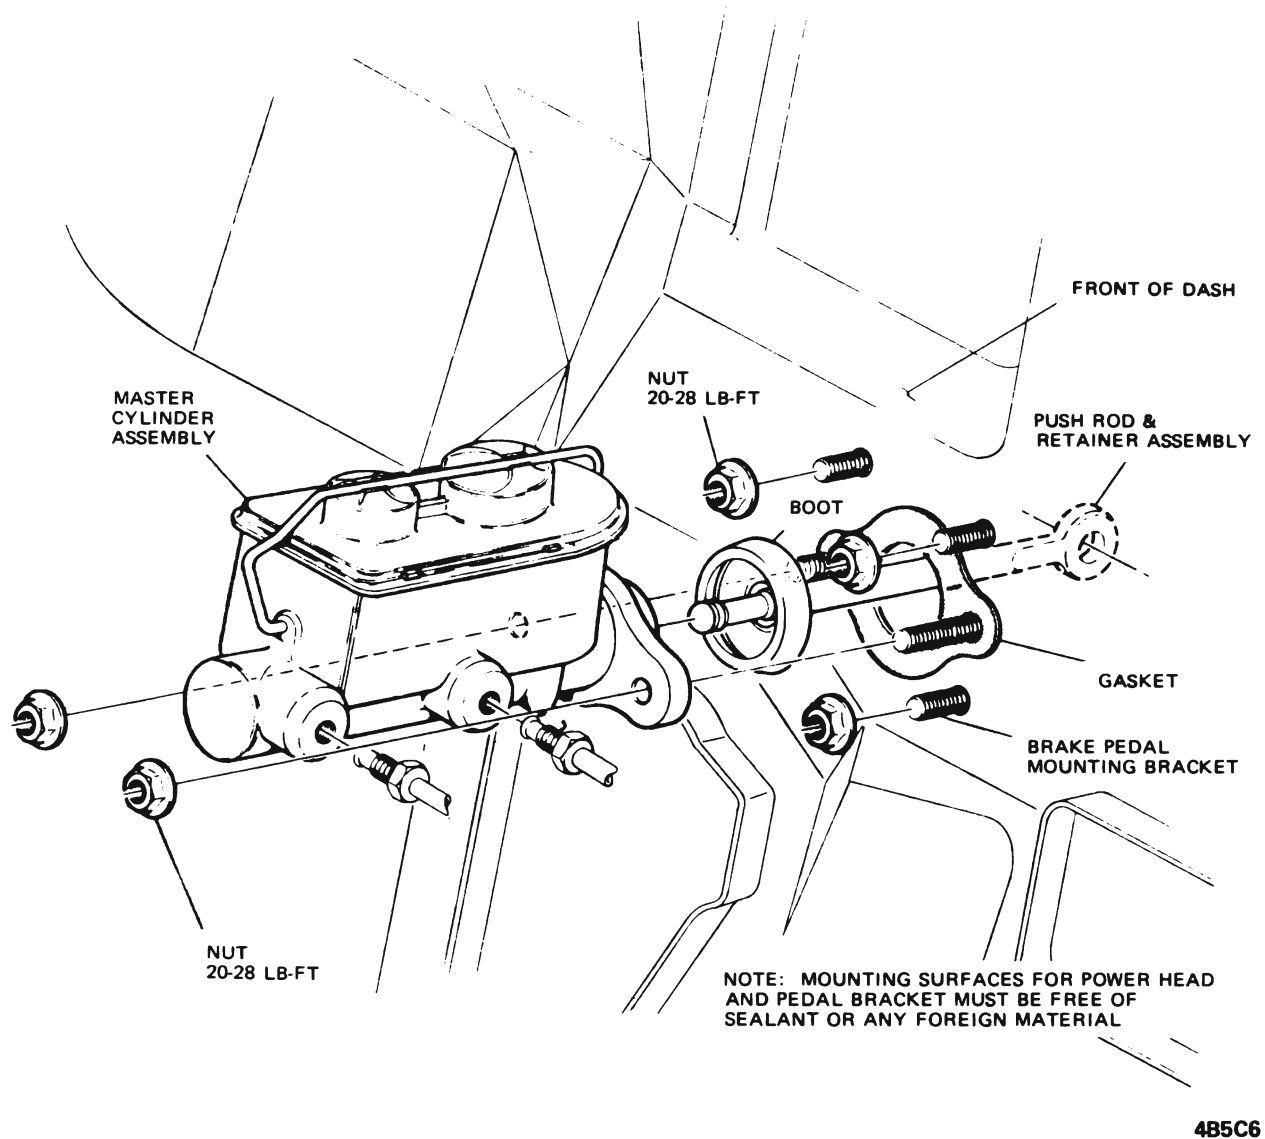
C-6 Master Cylinder Mounting - A Car Manual Brakes
